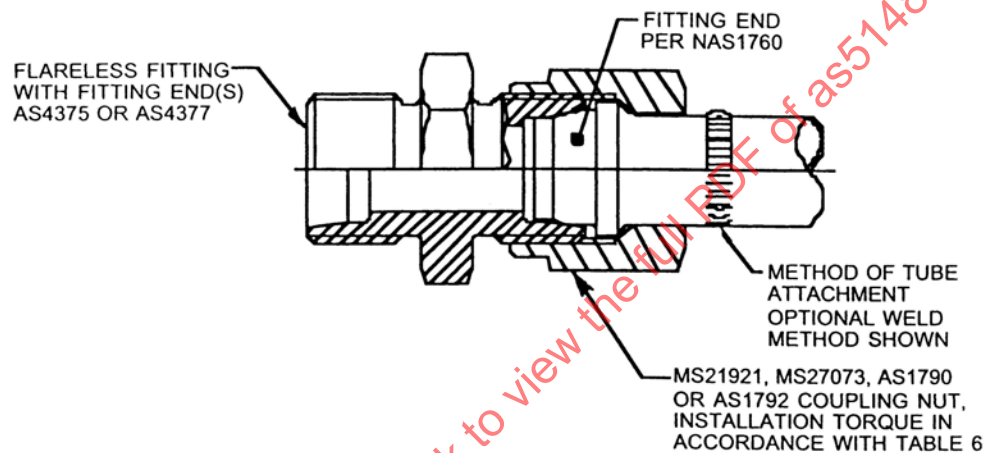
Tube Assembly Incorporating Fitting With NAS1760 Fitting End
